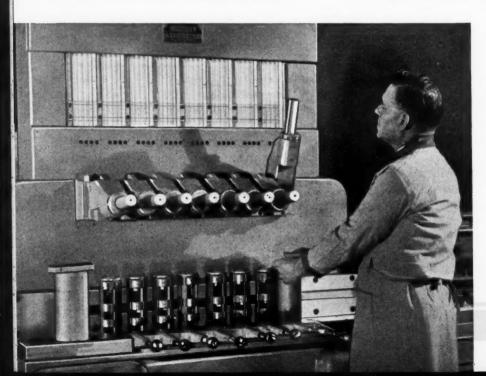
Here the Inspector is Calibrating the Set of Tubes Used in Gaging the Right-hand Cylinder Bore. A Minimum Boresize Master Ring Gage is Employed
